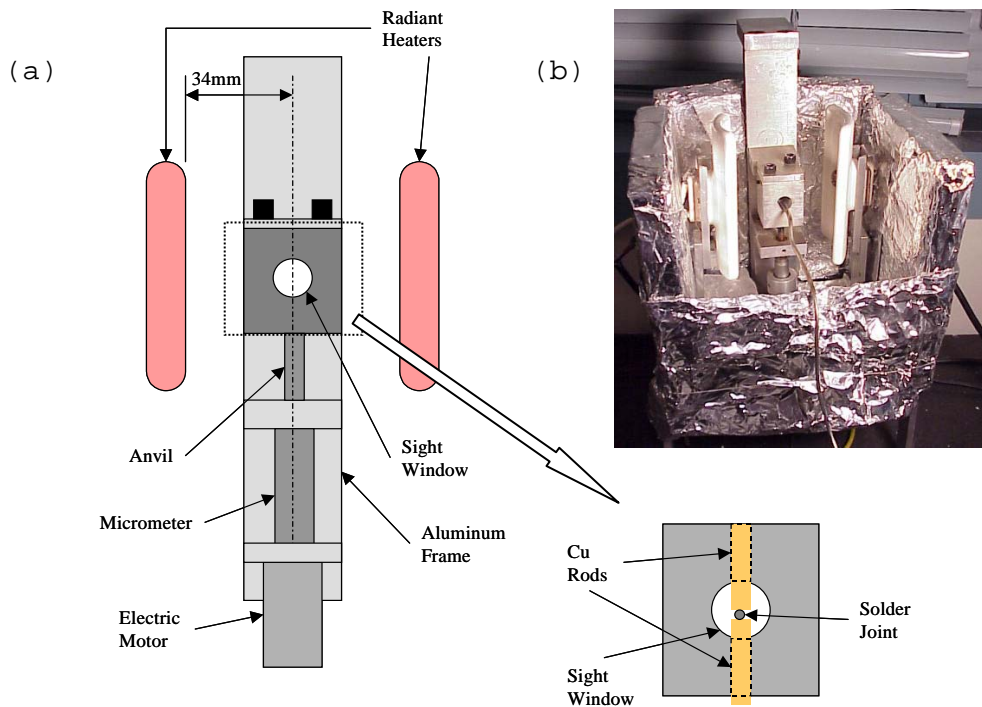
(a) Schematic and (b) picture of furnace and fixture for manufacture of SJS ball-type joint. The structure and fixture were cut from 7000 series aluminum. Additional insulation was placed over the top and front but is not seen in this figure.
